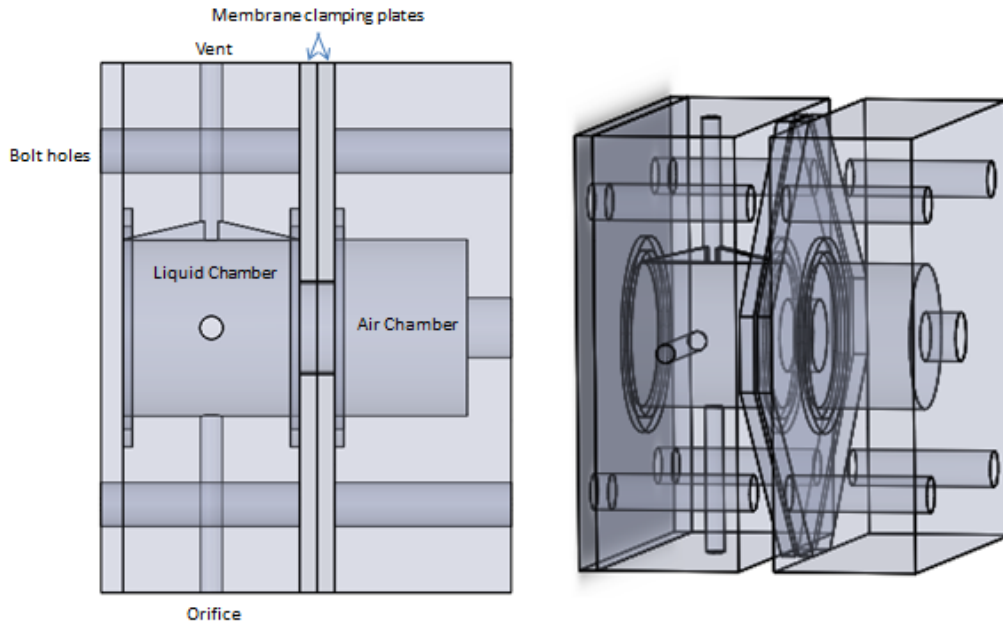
Final droplet generator design. This image includes the air and liquid chambers, the clamping plates and the liquid chamber bottom piece. Also shown are the bolt holes and the O-ring grooves.
